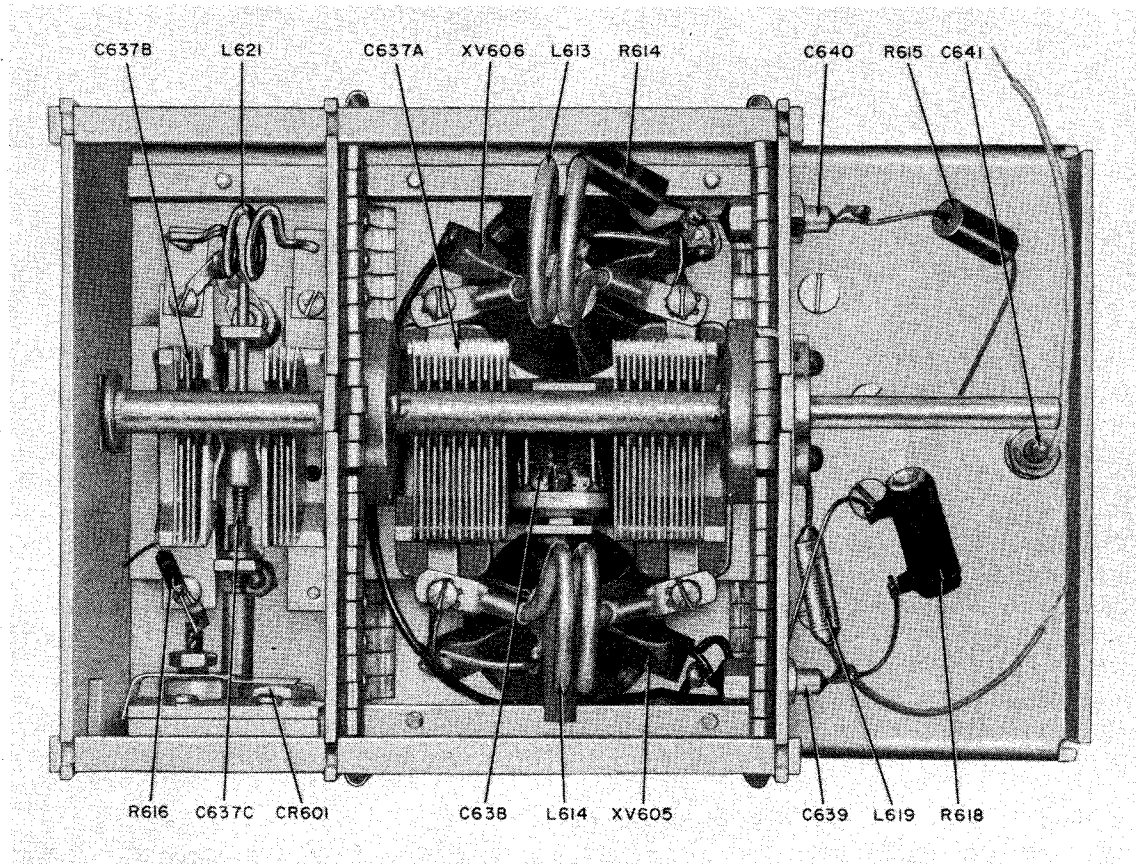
Power Amplifier Shelf Assembly, Bottom View
